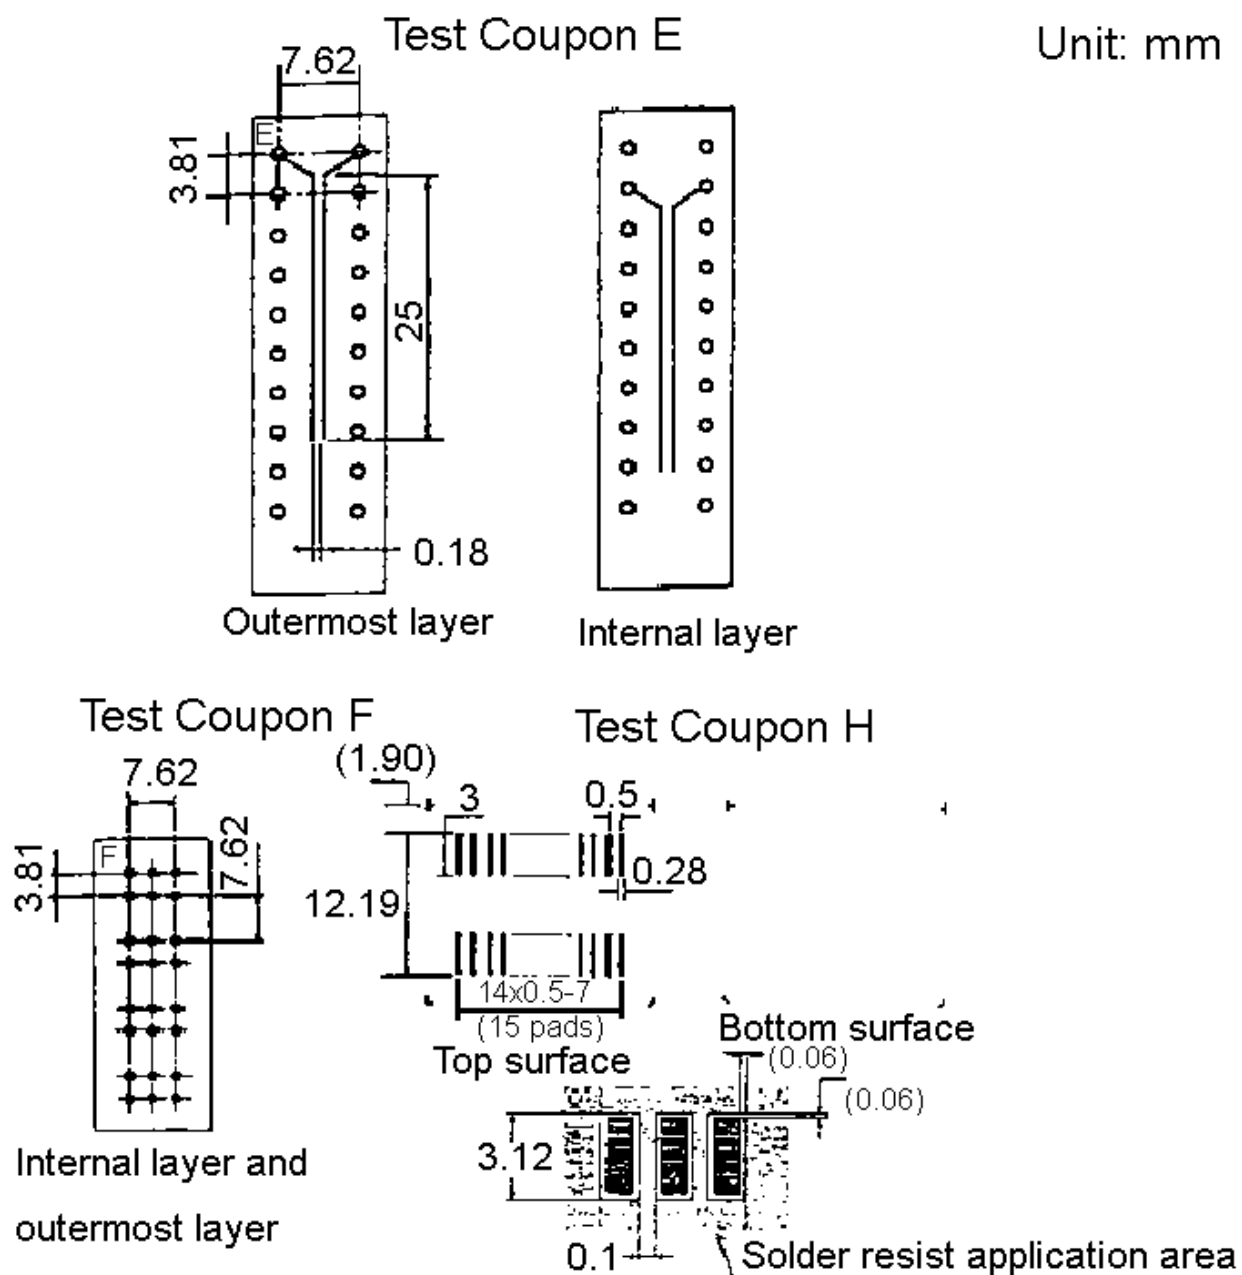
Test Coupons (for Multilayer Printed Wiring Board) (3/4)
